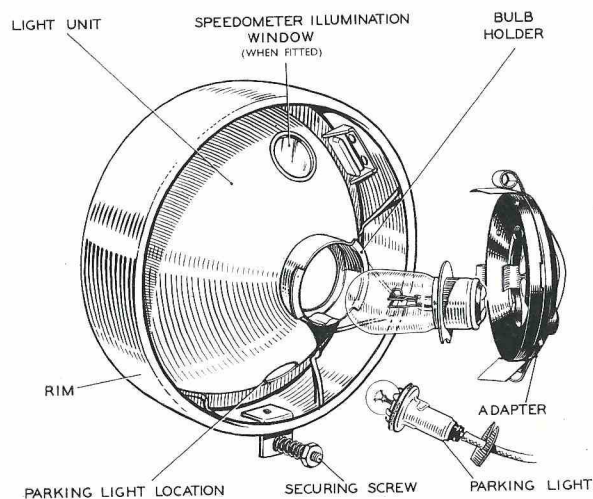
Model F575P Light Unit and Rim removed from Lamp Body
